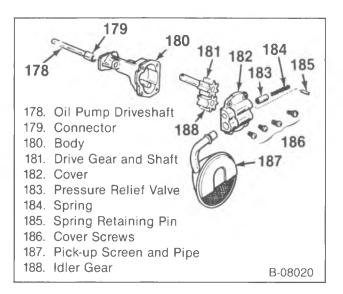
Oil Pump Components (5.0L and 5.7L Engines)
